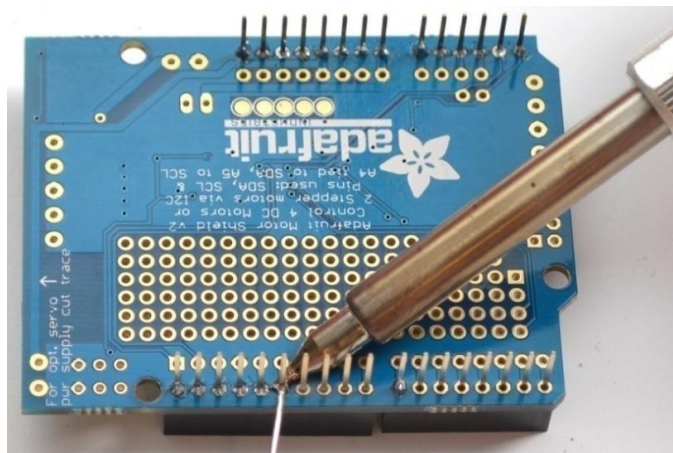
Once you have tacked and straightened all the headers, solder the remaining pins of each header.
